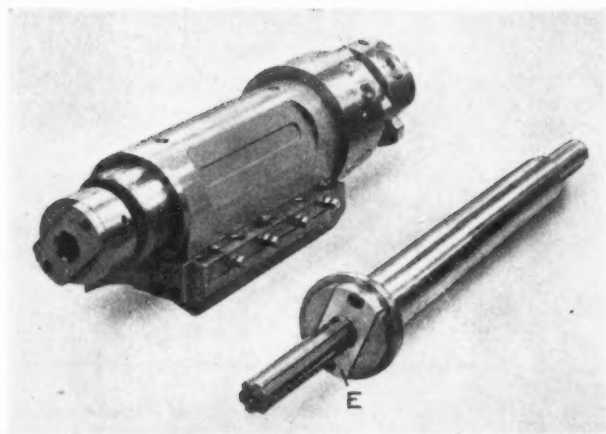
A Rear View of the Milling Attachment Seen in Fig. 1. The Drive Shaft for this Attachment is Shown in the Foreground
